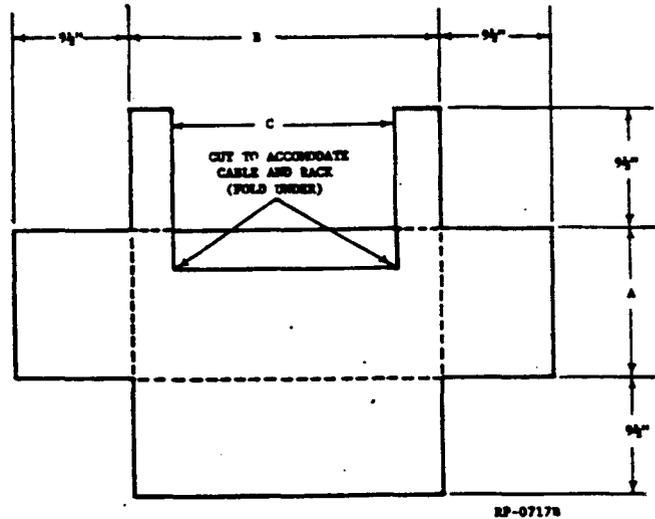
WIRE BASKET DIMENSION GUIDE (PAR. 4.210)
